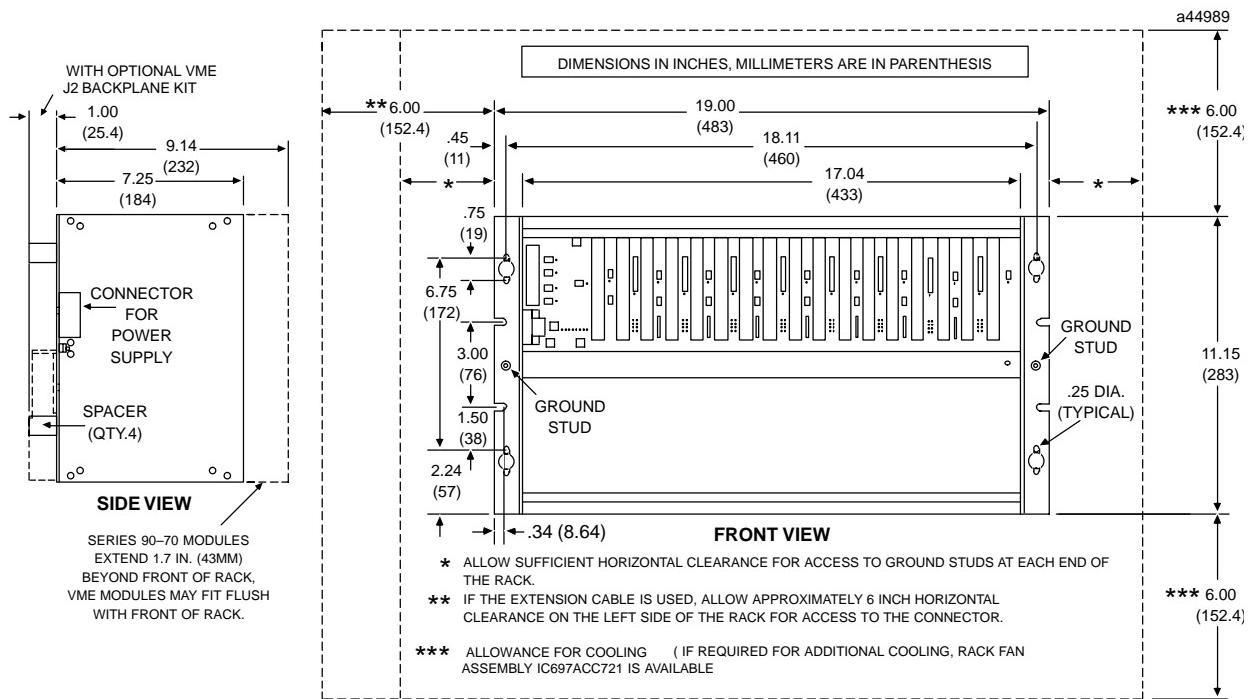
VME Integrator Rack Dimensions for Rear (Panel) Mount Installation
